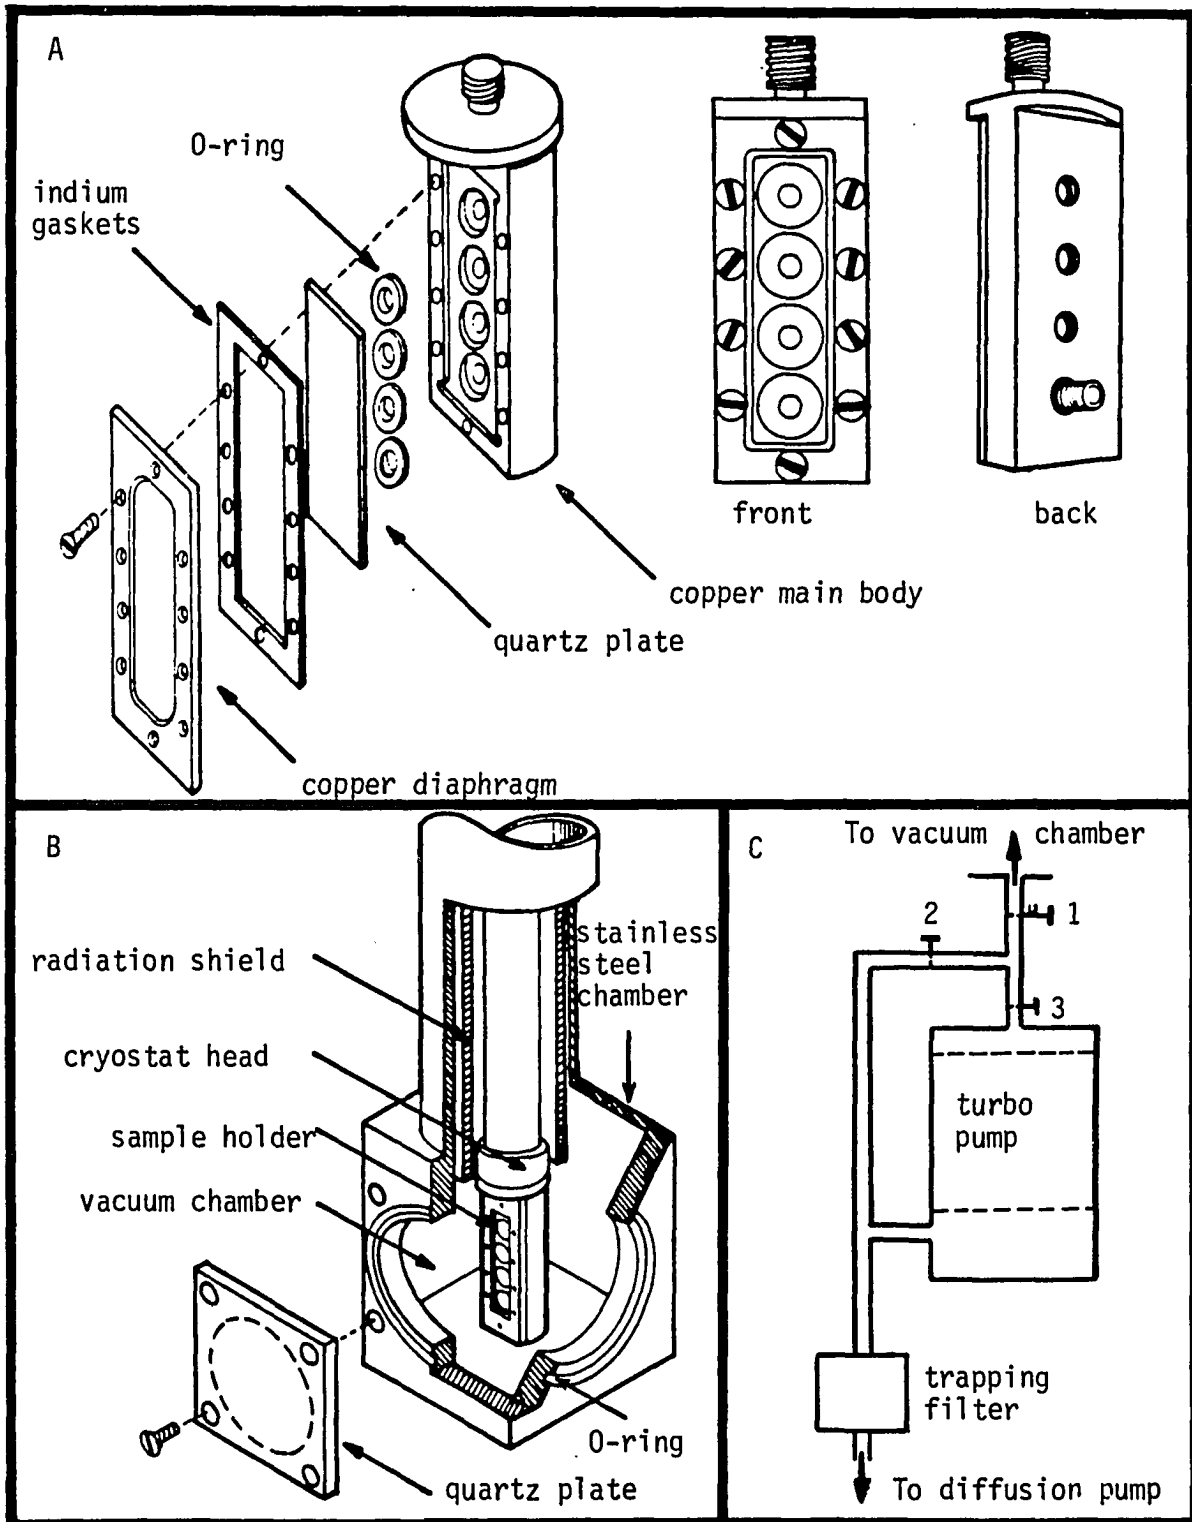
Exploded and assembled views of multiple sample holder (A), vacuum sample chamber (B), and part of the vacuum system (C) (sketches are not to scale)
